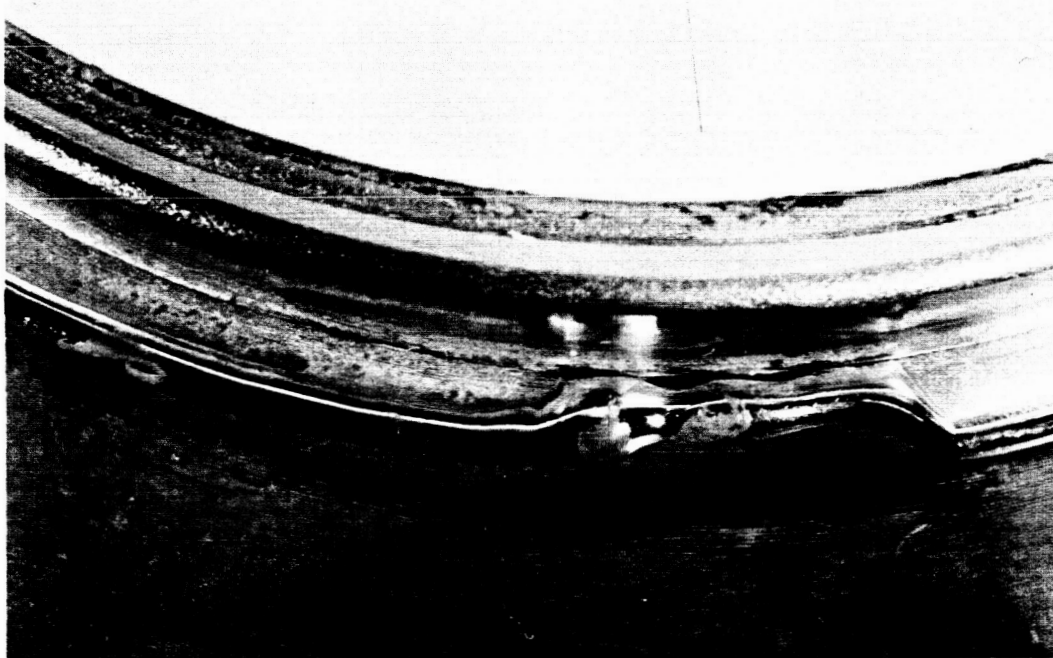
Welded Joint and Nearby Crack which Developed in Spinning of Ceramic Assembly.
